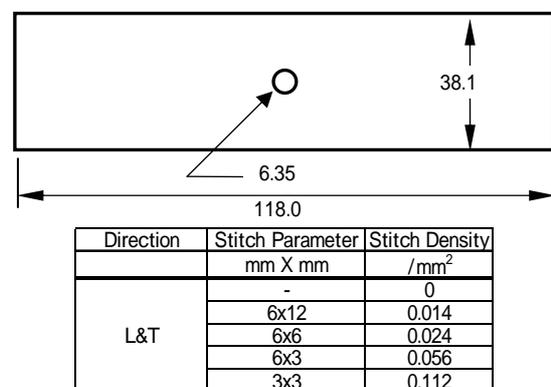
Dimensions of NAL-III test specimen and stitch conditions
